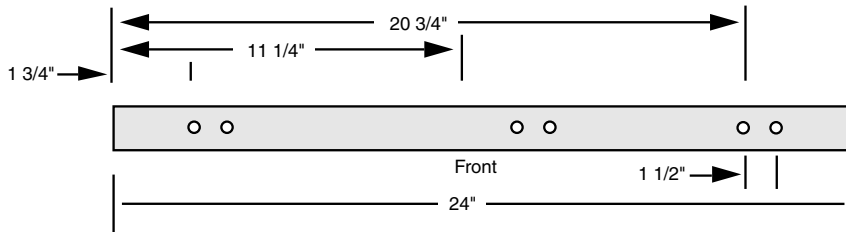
Cutting and drilling guide for the motor mount rails (four).
